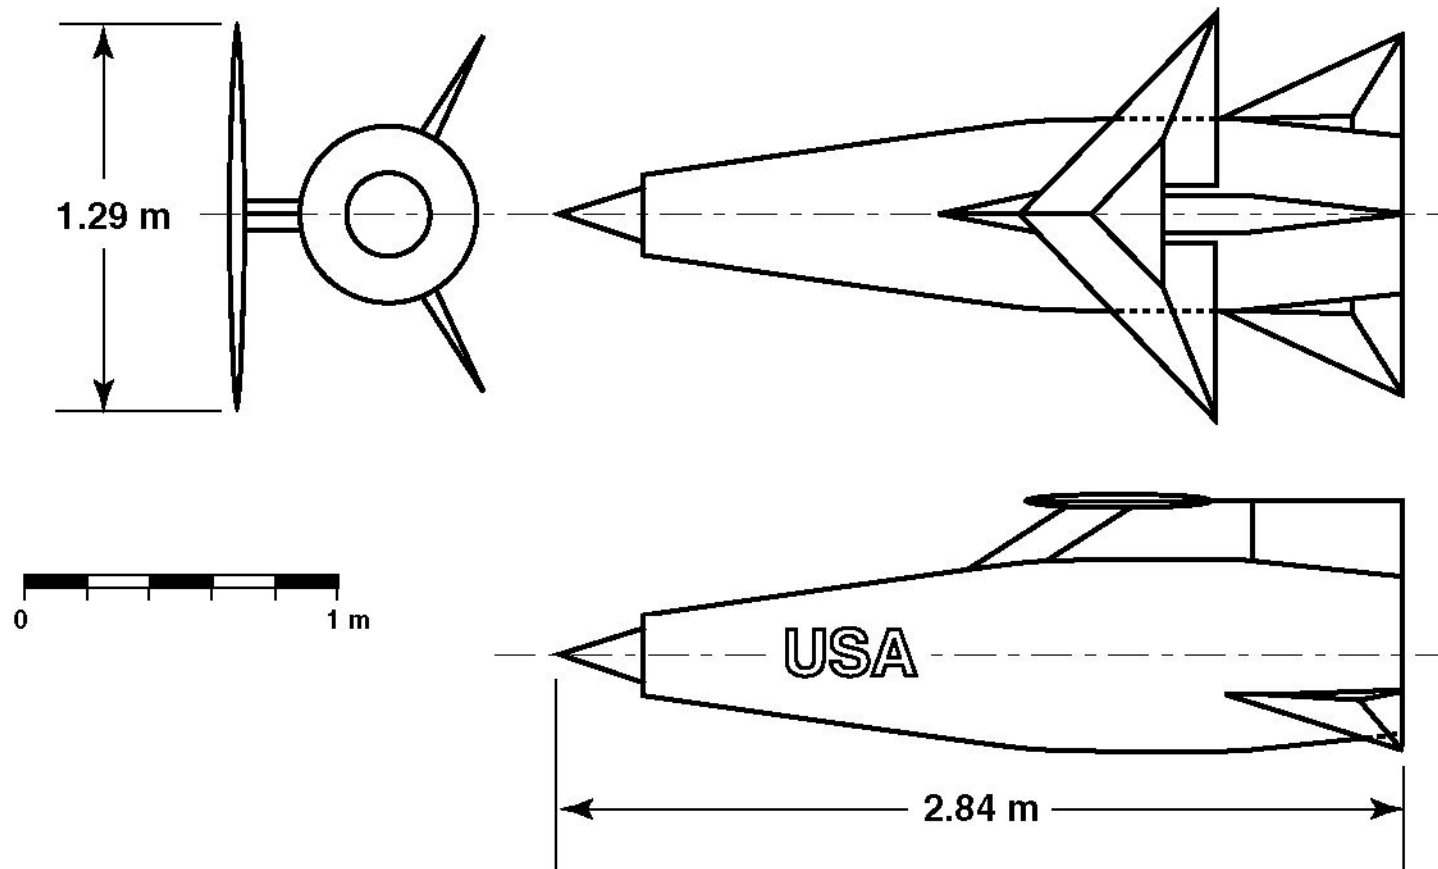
Layout drawing of the Ramjet Flyer JF-6
